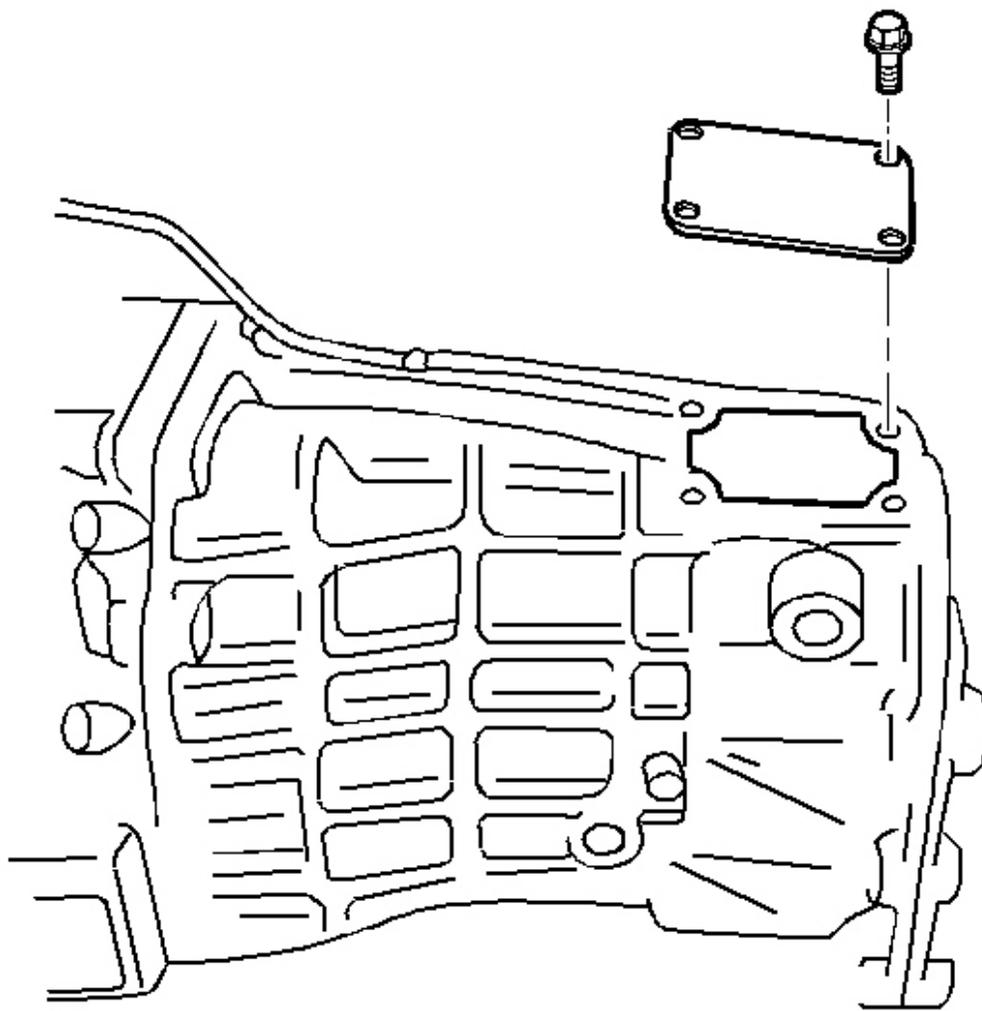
Installing/Removing Cover Plate & Cover Plate Bolts
